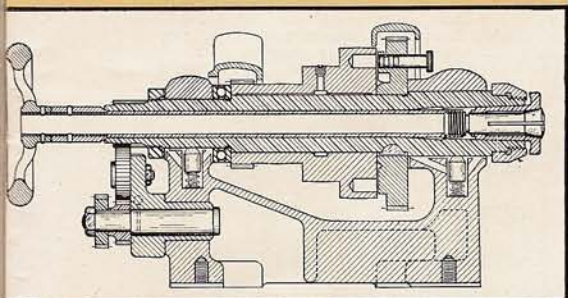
Cross Section of Headstock Showing Collet Chuck Attachment.
